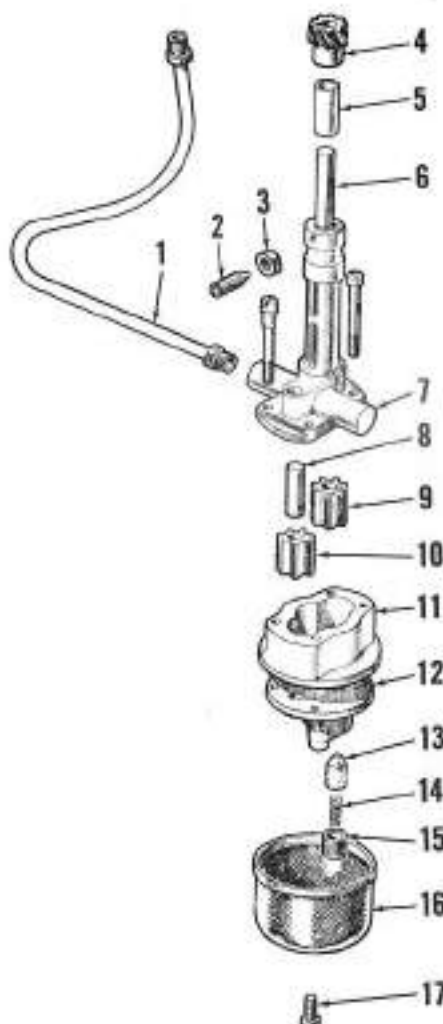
Exploded view of oil pump used on four-cylinder engines. Adjusting screw is secured by wire through hole in cover (12) and slot in adjusting screw. Plunger (13) now has a flat seat instead of conical seat shown.
